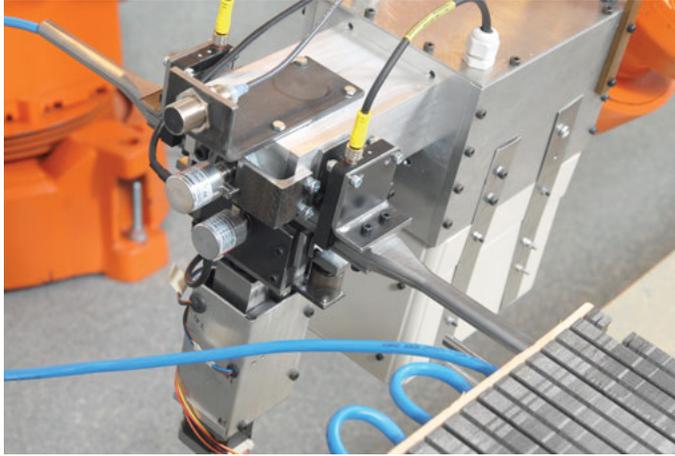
The second constructed prototype version of the cable feeder tool.
